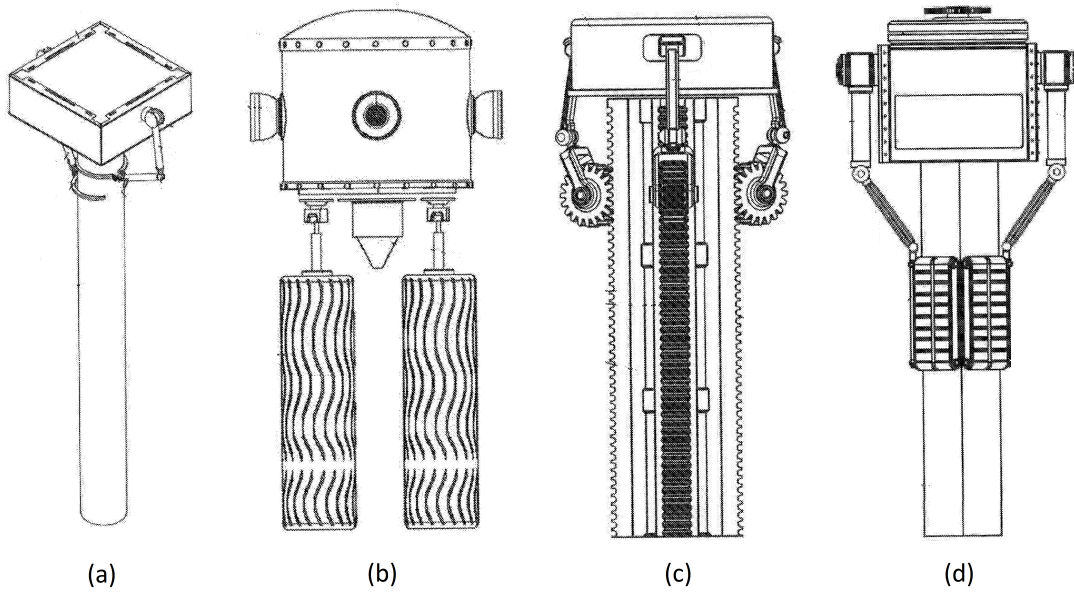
Patent result 2 - Multiple techniques for in-space manufacturing with growing technique through additive manufacturing, with (a) annular tube clamp, (b) rectangular clamp with rollers, (c) gearing and (d) rectangular grippers. Espacenet CPC categories: B22, B23K, B33Y and B64G1 (Figure adapted from patent CN107921564A)
